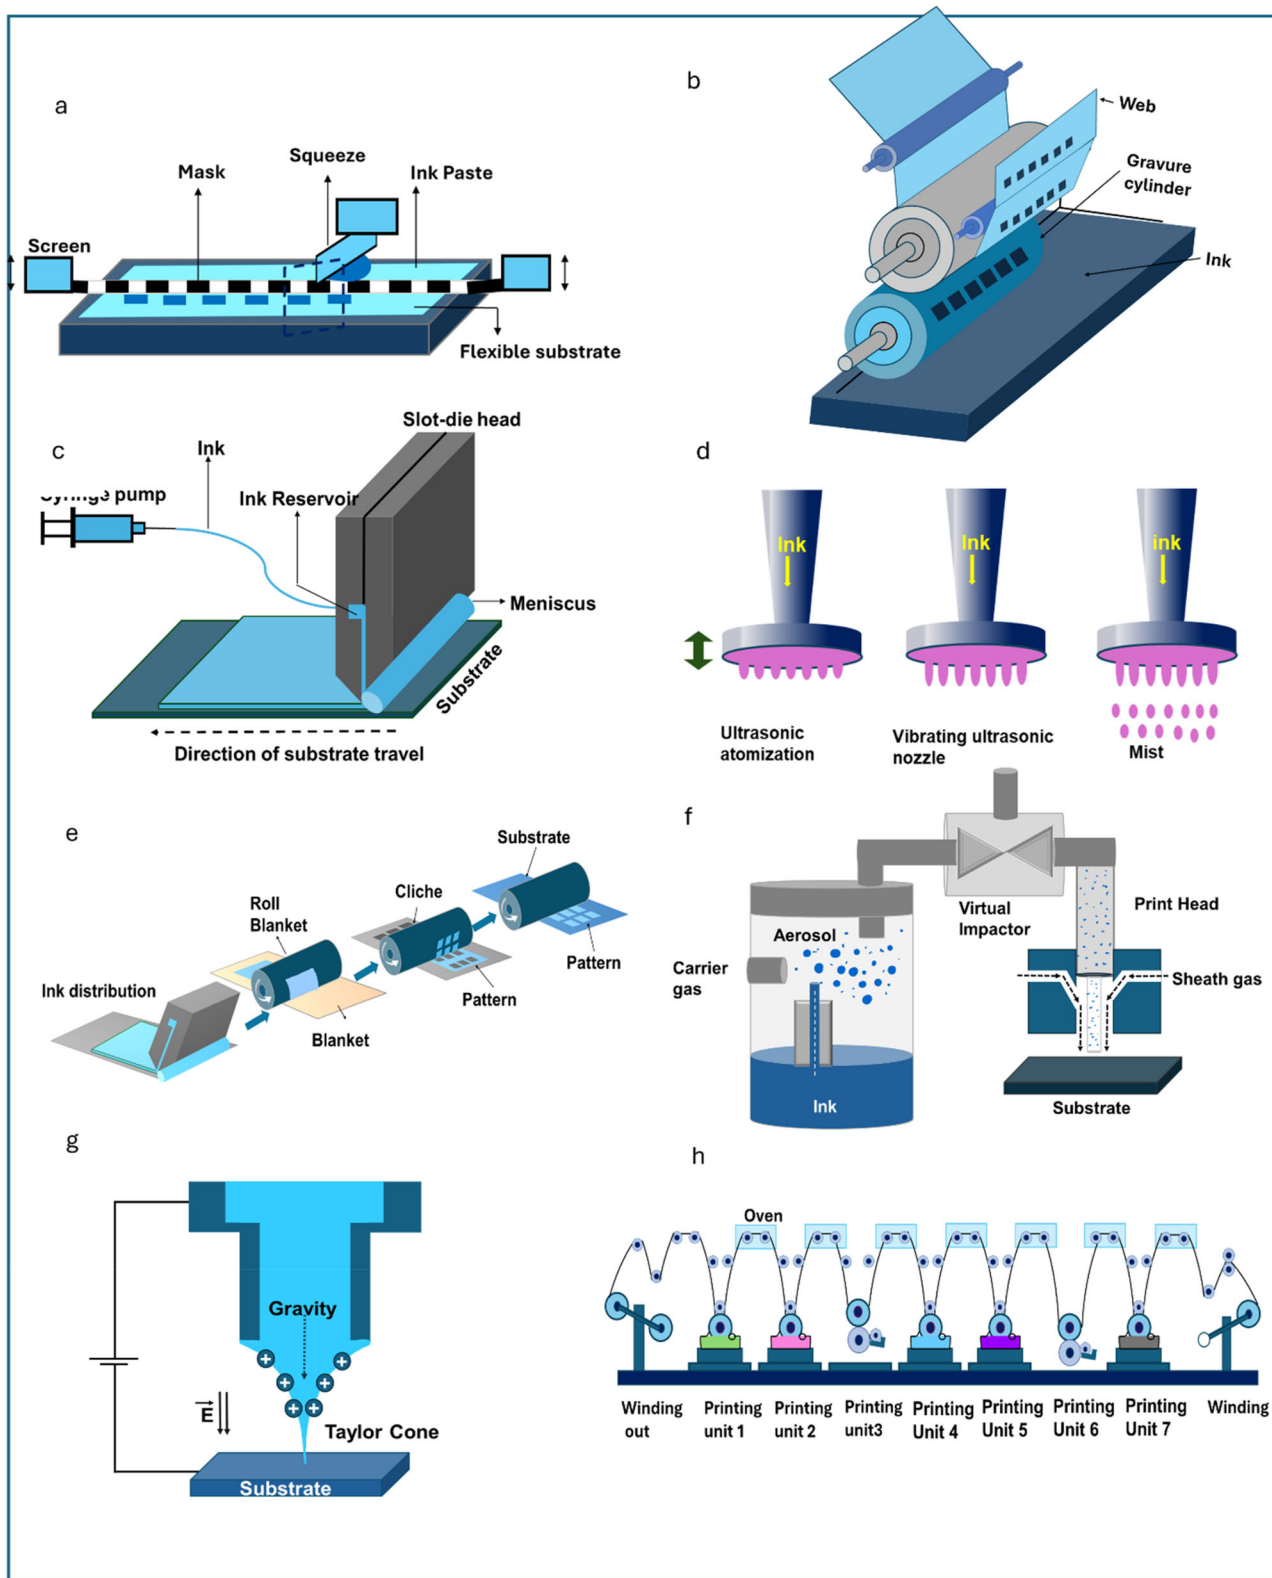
| Schematic illustrations of printing process. Large volume conventional printing techniques for printed electronics, screen printing (a), gravure printing (b). Uniform thin layer coating techniques for printed electronics, slot die coating (c) and spray coating (d). Low feature size printing methods, reverse offset printing (e),
